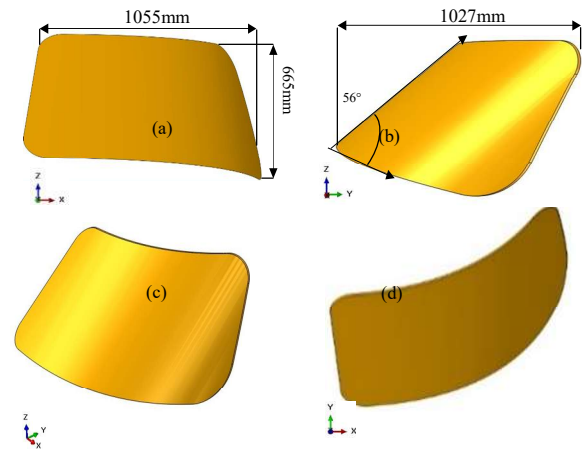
Geometry of windshield; (a) Front view, (b) Side view, (c) Isometric view, (d) Top view [27]
